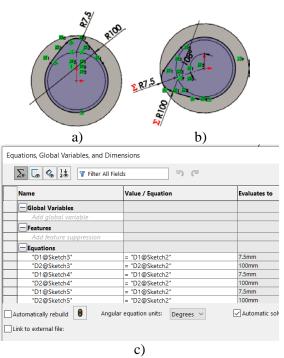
Construction of cam profiles: a) – sketch for the first cam; b) – sketch for the following cams; c) – an equation in the SolidWorks system
